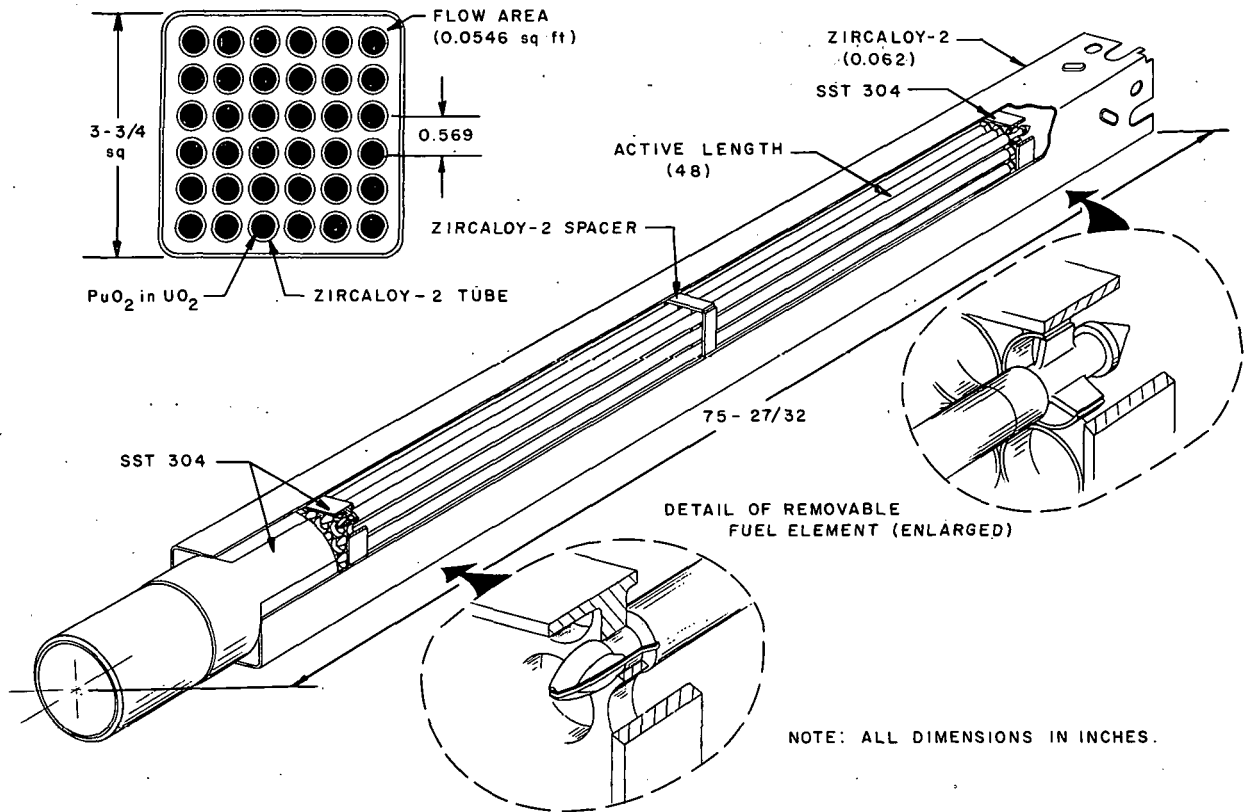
Sectional views of Plutonium Test Fuel Subassembly
